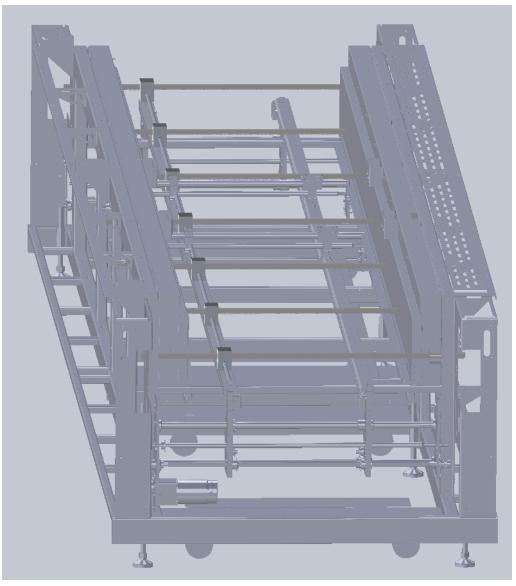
Isometric views of rack and pinion modules in oven from front left viewing position. 7 modules used, representing an oven model with a vacuum chamber. Total oven length approximately 250".
